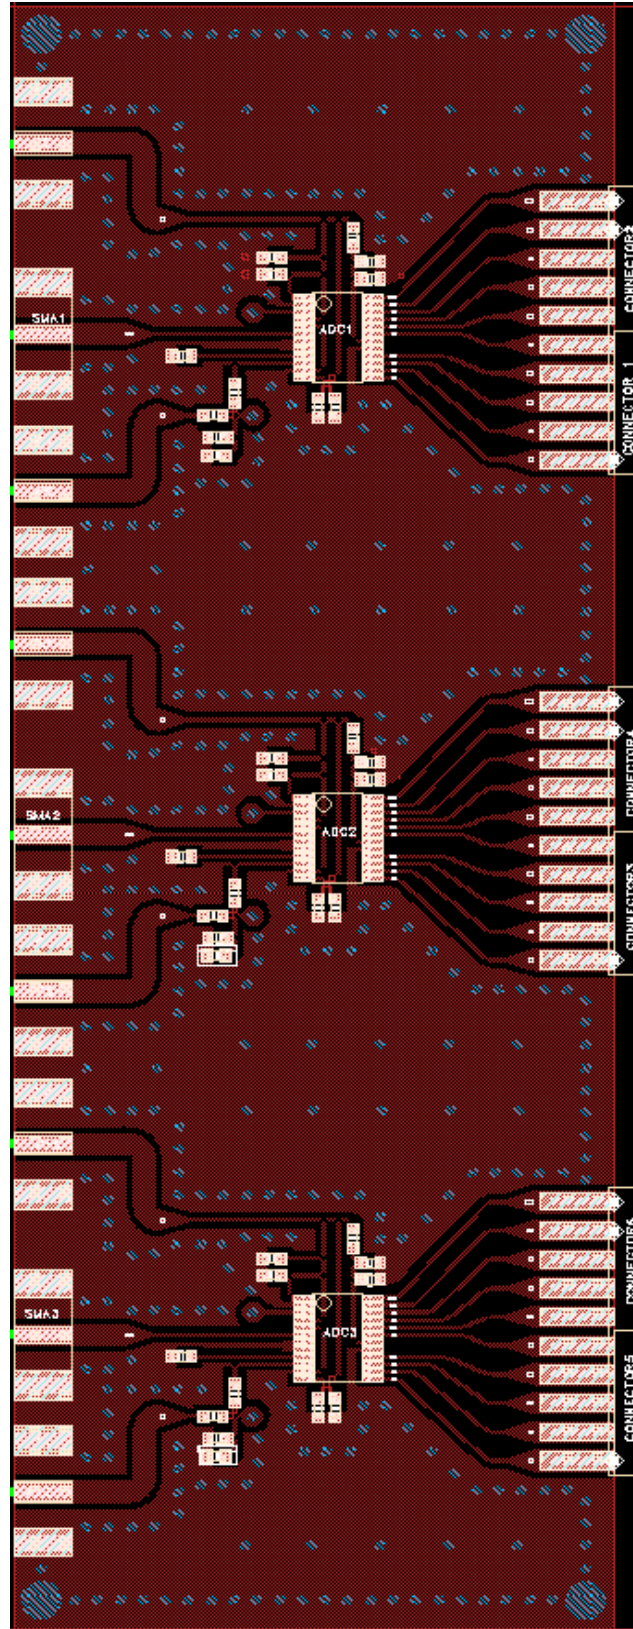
Top-layer PCB layout of ADCs of the CSR Receiver
